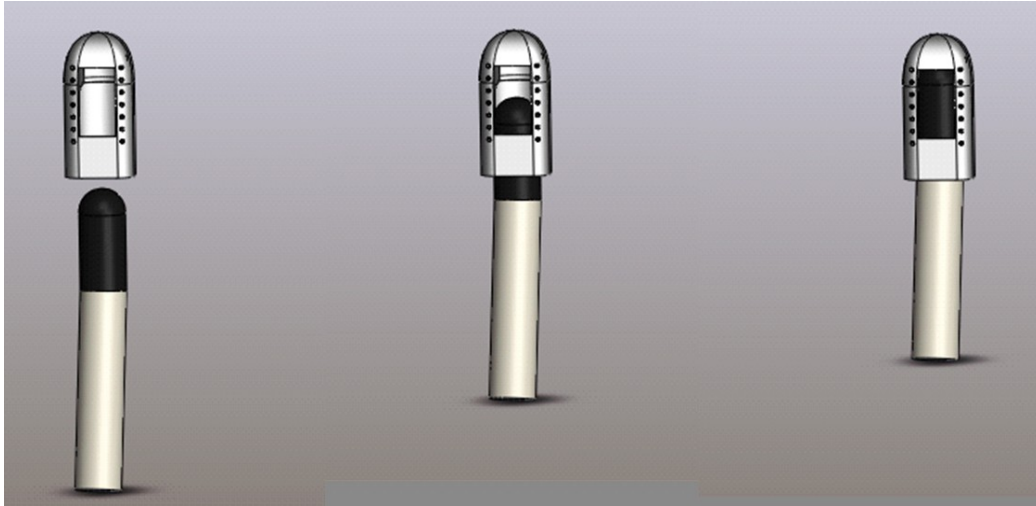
Drawing shows the insertion of TRUS probe into clip-on optical probe
